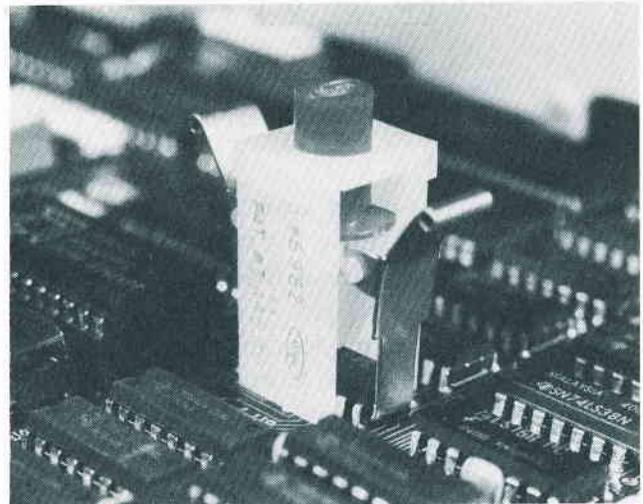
A spring-loaded dual-in-line extractor tool.
